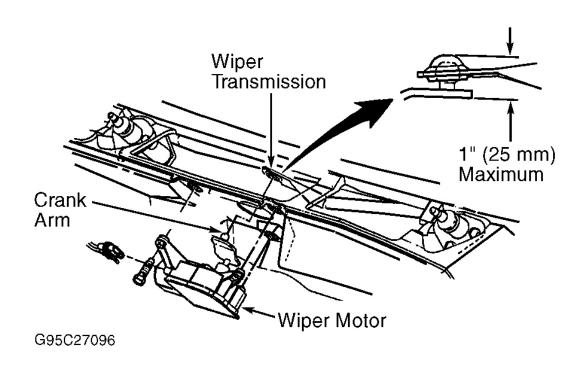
Removing & Installing Front Wiper Motor Courtesy of GENERAL MOTORS CORP.
